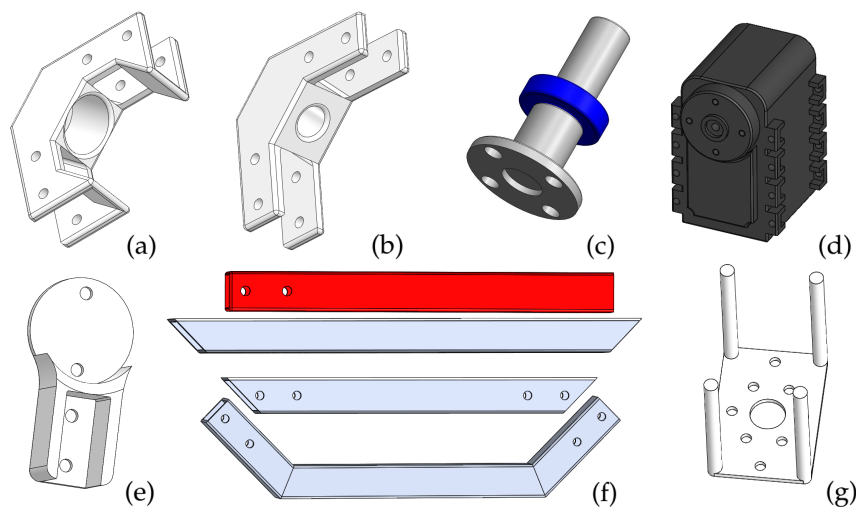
Junction and bearing support (a), junction (b), roll-pitch shaft and bearing (c), Dynamixel motor (d), propeller motor support (e), aluminum profiles (f), battery support (g).
